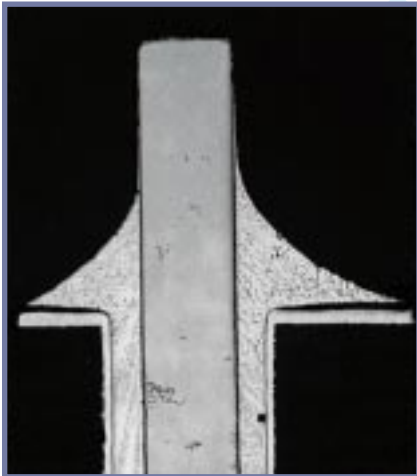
Fillet lifting of Sn3.4Ag4.8Bi solder in a through-hole joint.
